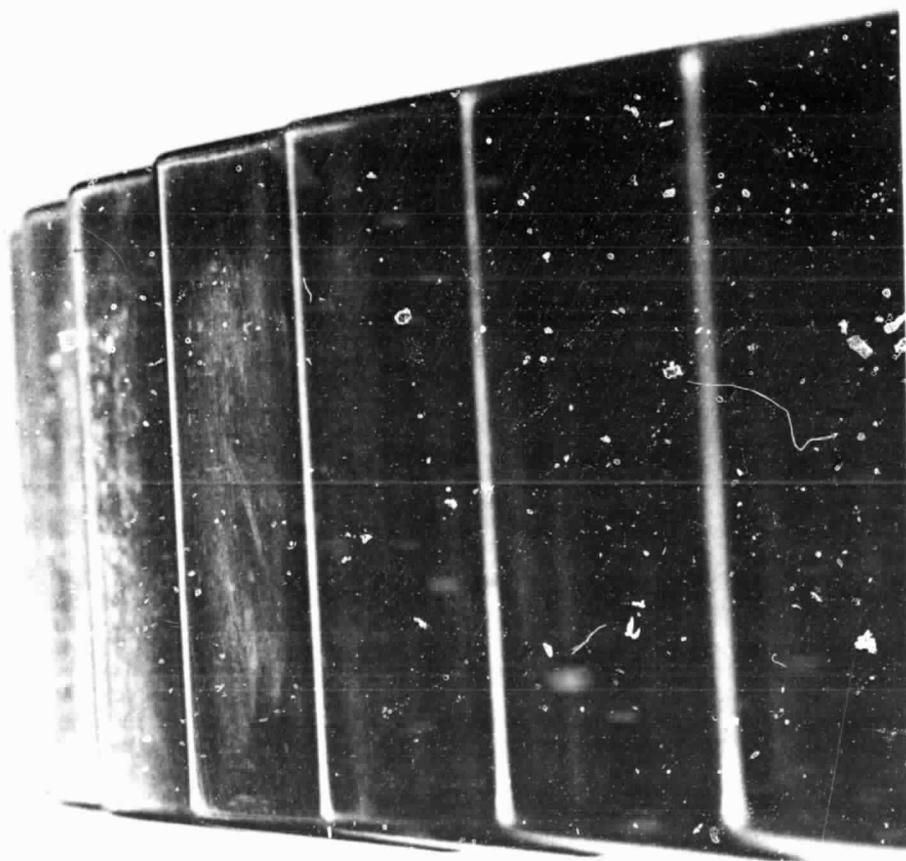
FIRST STAGE PLANET GEAR TOOTH SURFACES - RING GEAR CONTACT
